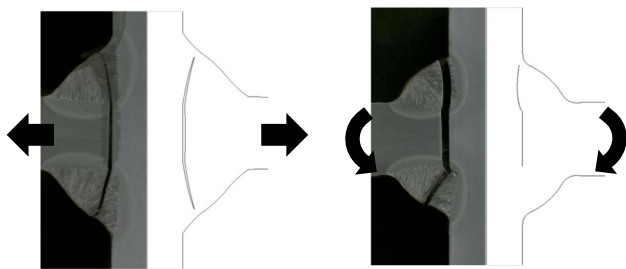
Fatigue fracture paths from the weld root in the LCX joints subjected to axial and bending loads, determined by an experimental fatigue test (left) and a numerical crack growth analysis (right) [25]
